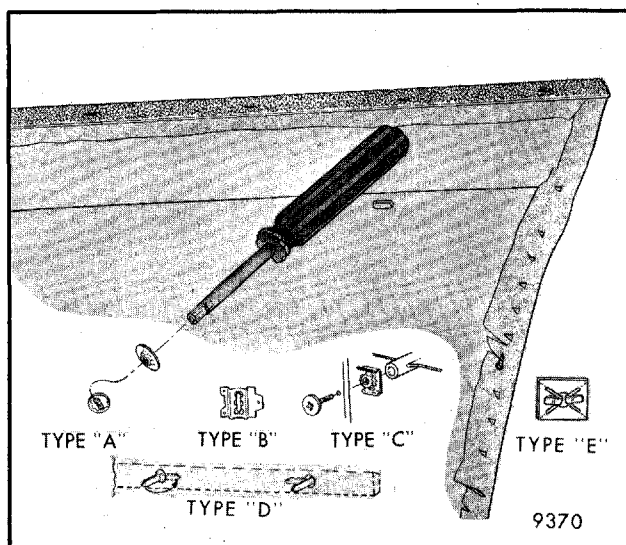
Door Trim Pad Molding and Applique Removal
